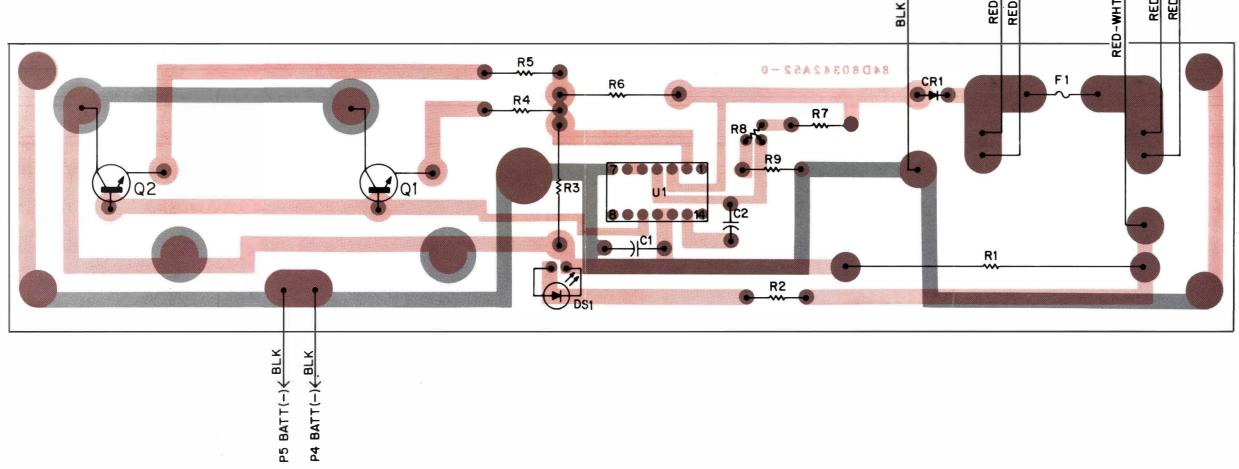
Battery Pack - Printed Wiring Board Assembly
